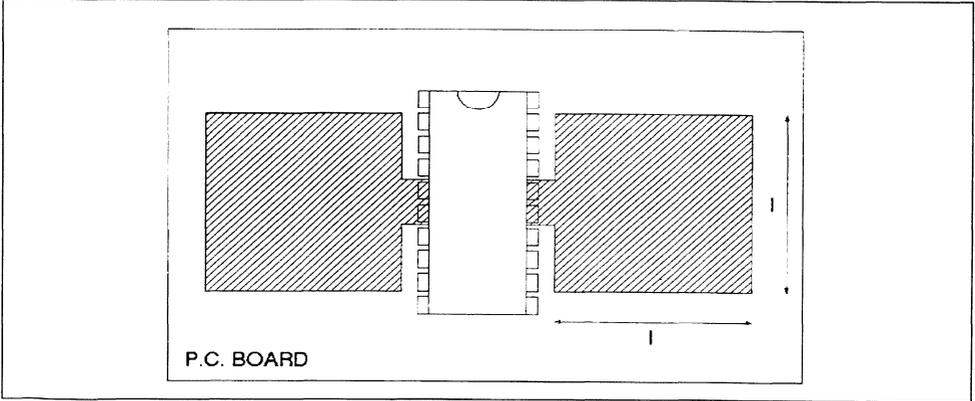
$R_{th(j-a)}$ of POWER DIP 16+2+2 vs side l for heat sink on the PCB lower side
